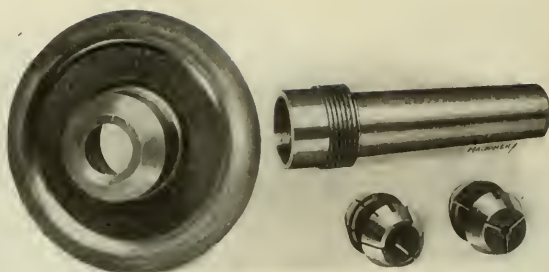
Parts of Collet Chuck made by Globe Engineering Co.
